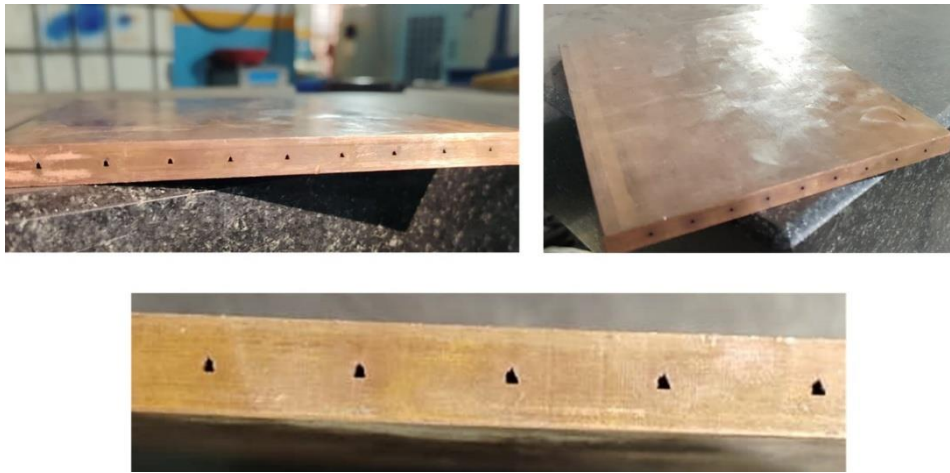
Dimensional details of the triangular microchannel heat exchanger test plate. -Fabricated Model
